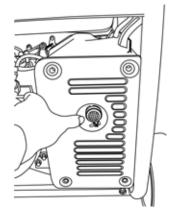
Remove Spark Arrestor Enclosure Panel
